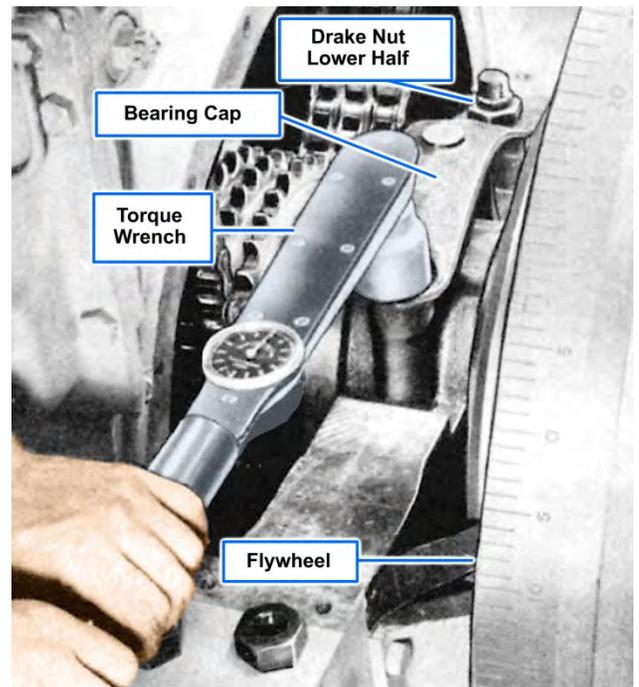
Using a torque wrench to tighten a main bearing.
